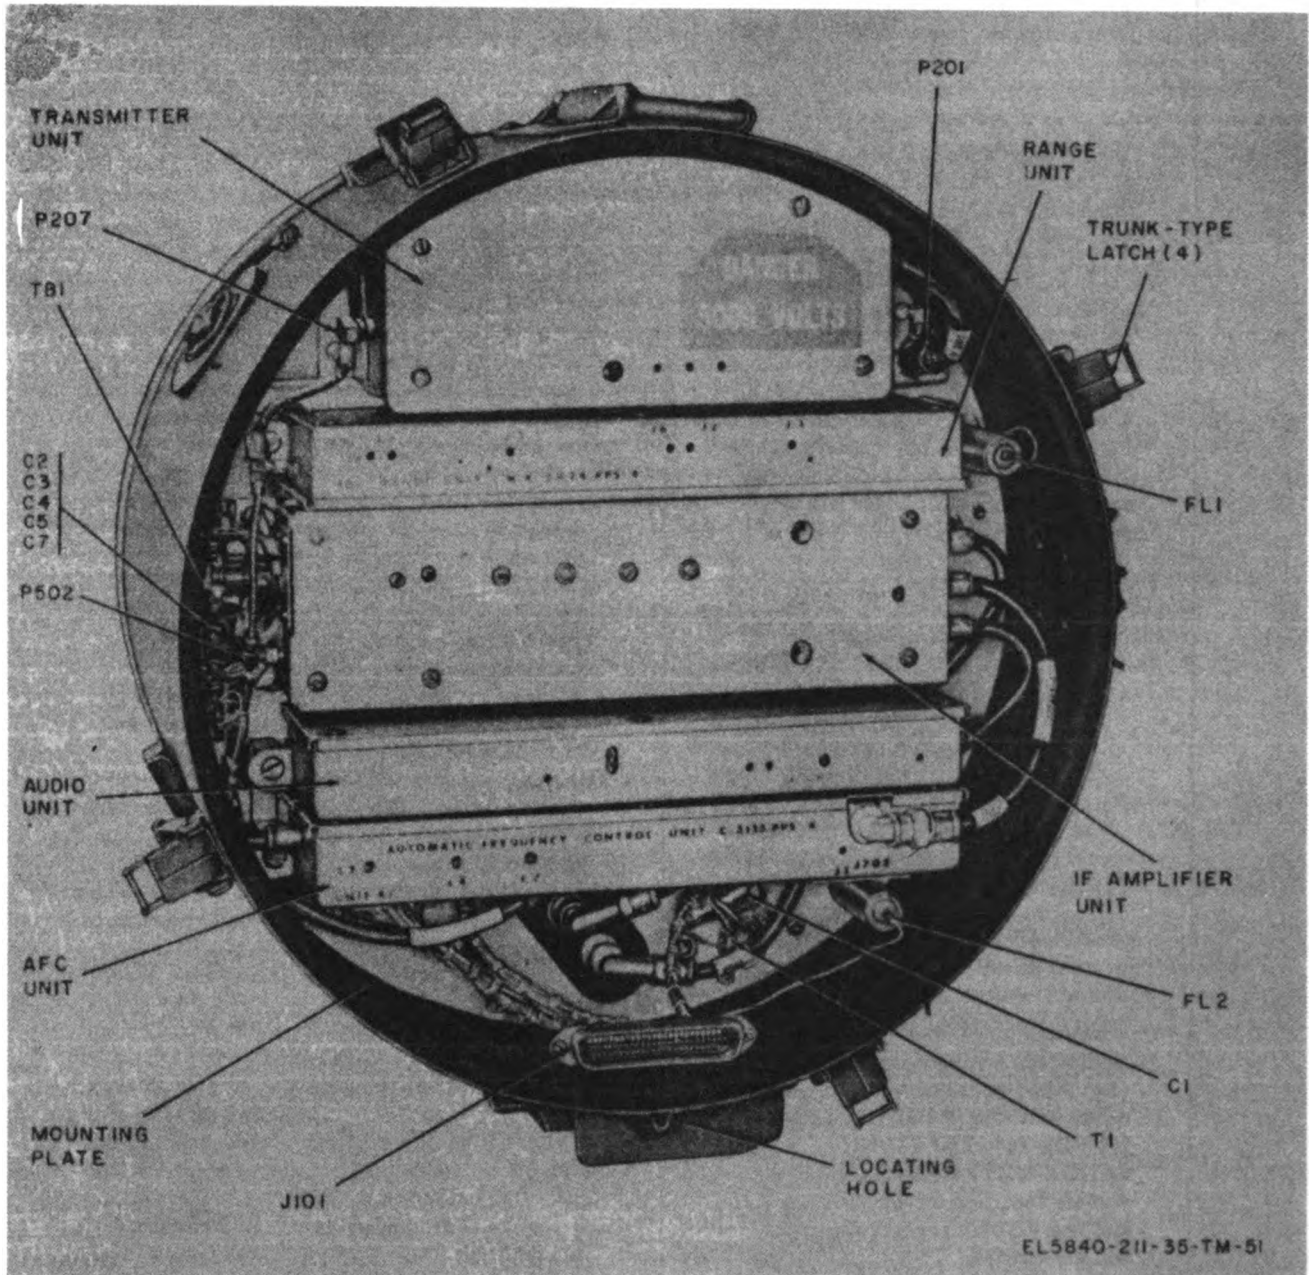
Receiver-transmitter, rear side, panel removed.
